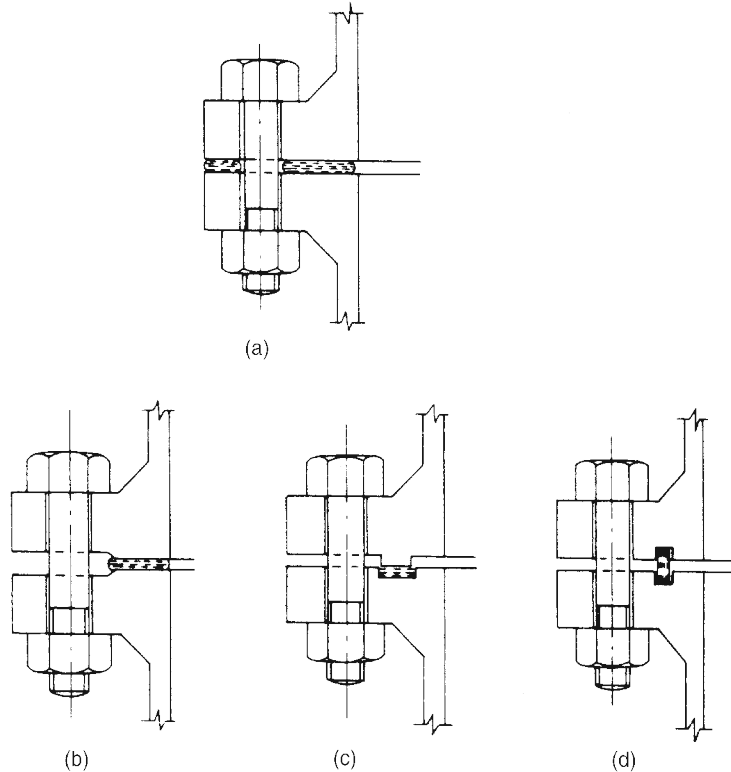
Flange types and faces (a) Full-face (b) Gasket within bolt circle (c) Spigot and socket (d) Ring type joint
